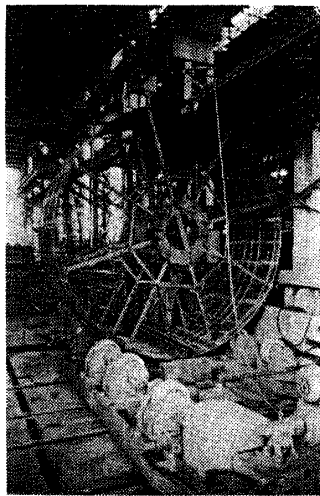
(b) Jigs for maintaining circularity of frames (The photo. shows submerged-arc welding of outside of longitudinal joint).
